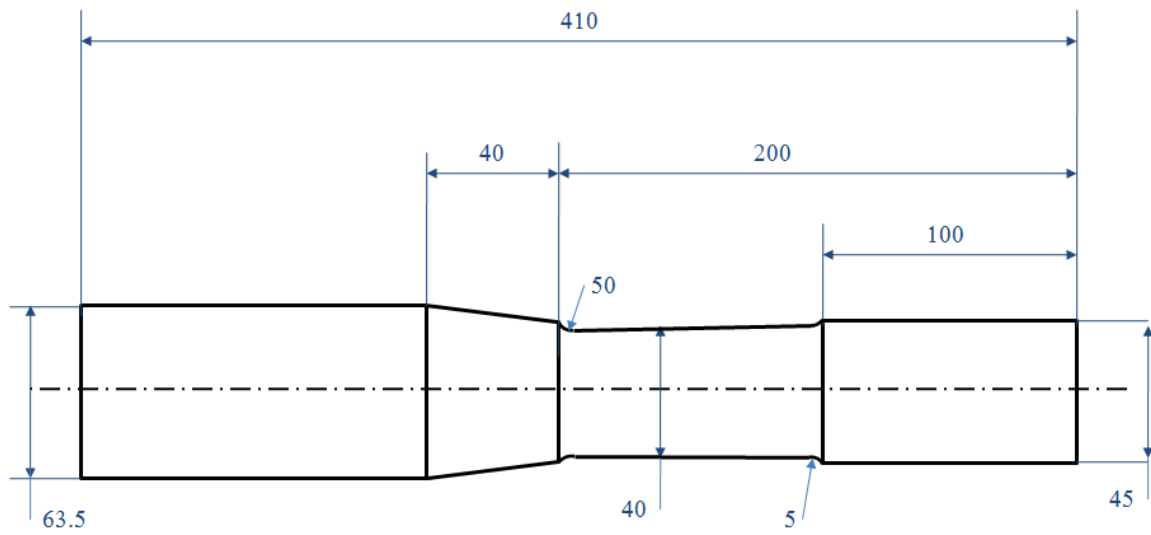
Geometry and dimensions of the SAE shaft [88], all dimensions in mm
